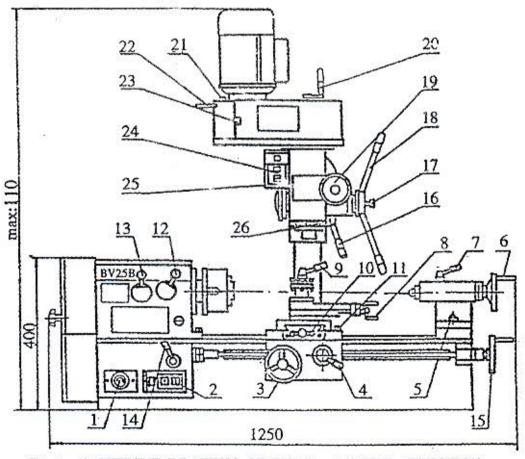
3 OUTLINE DRAWING OF BV25B – 3 MULTI – FUNCTION CUTTING MACHINE
